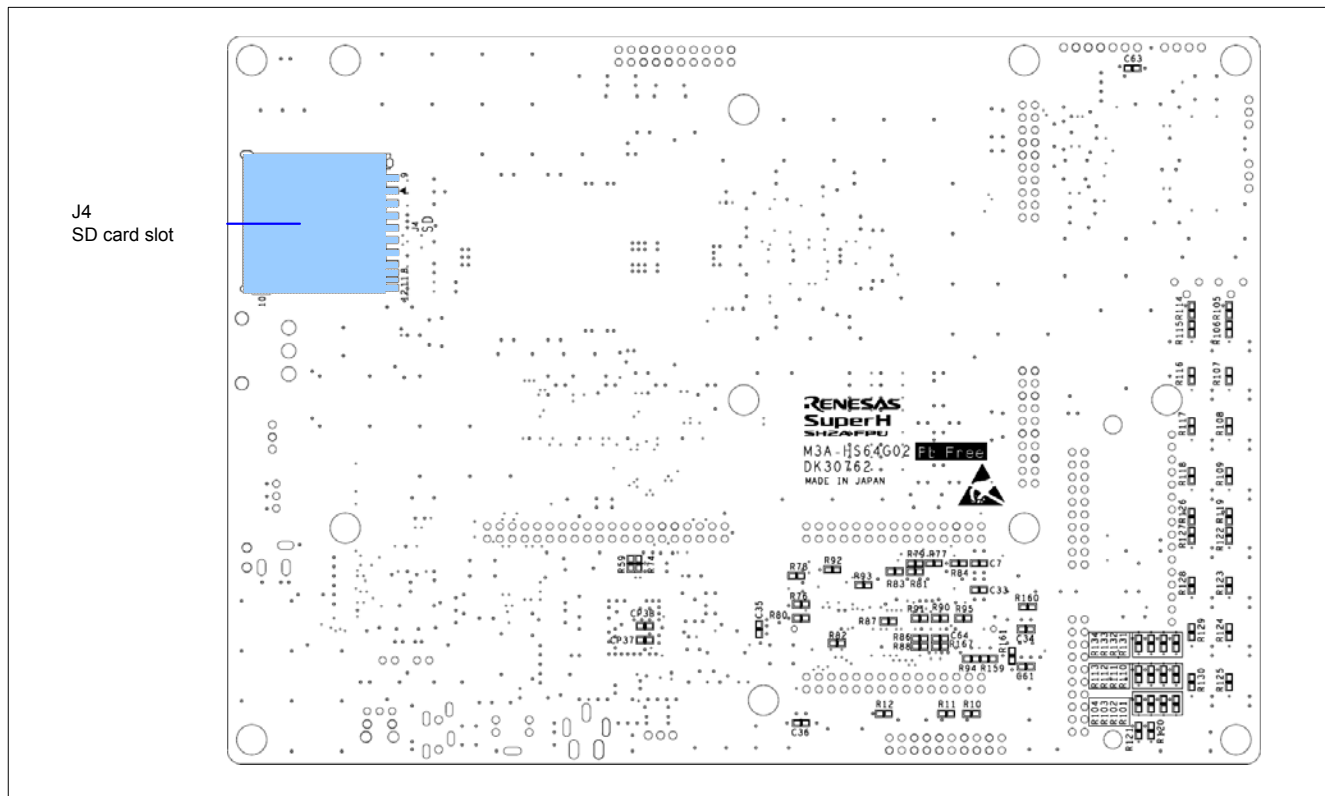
M3A-HS64G02 Connectors (Top View of the Solder Side)
